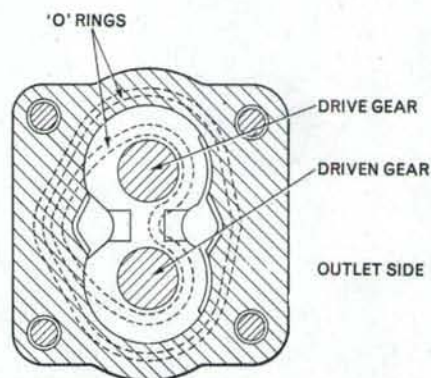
Drawing showing correct installation of gears and bearing blocks in pump body. View is from rear (flanged) end of pump body.
